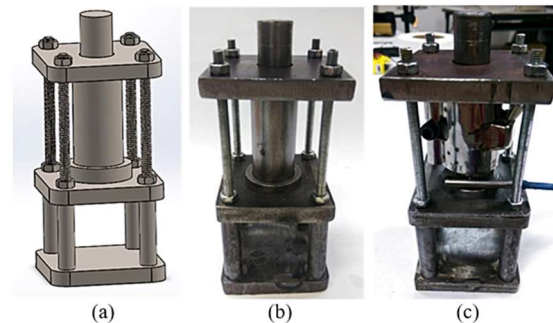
Cold pressed piston-cylinder set (a) drawing (b) cylinder set (c) cylinder set with electric heater
